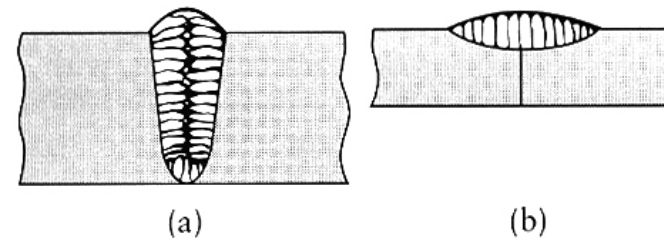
Grain structure in (a) a deep weld and (b) a shallow weld. Note that the grains in the solidified weld metal are perpendicular to their interface with the base metal. In a good weld, the solidification line at the center in the deep weld shown in (a) has grain migration, thus developing uniform strength in the weld bead.
